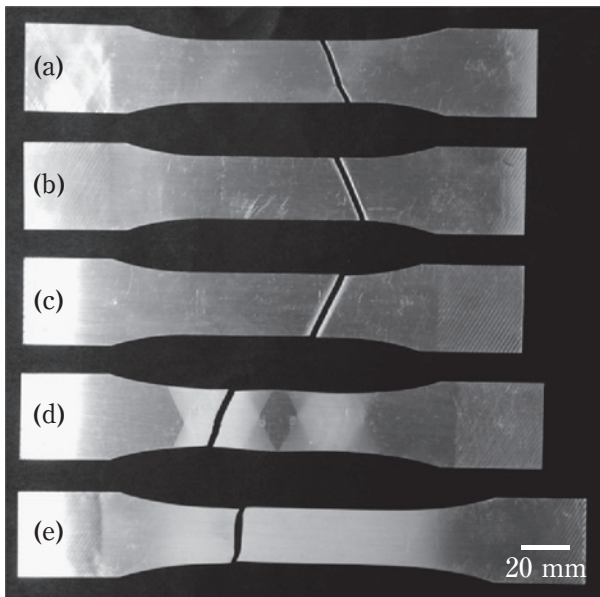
Appearance of the tensile test specimens. (a) as-rolled, (b) 250°C -20 min, (c) 250°C -50 min, (d) 250°C -150 min, (e) 250°C -1000 min.
